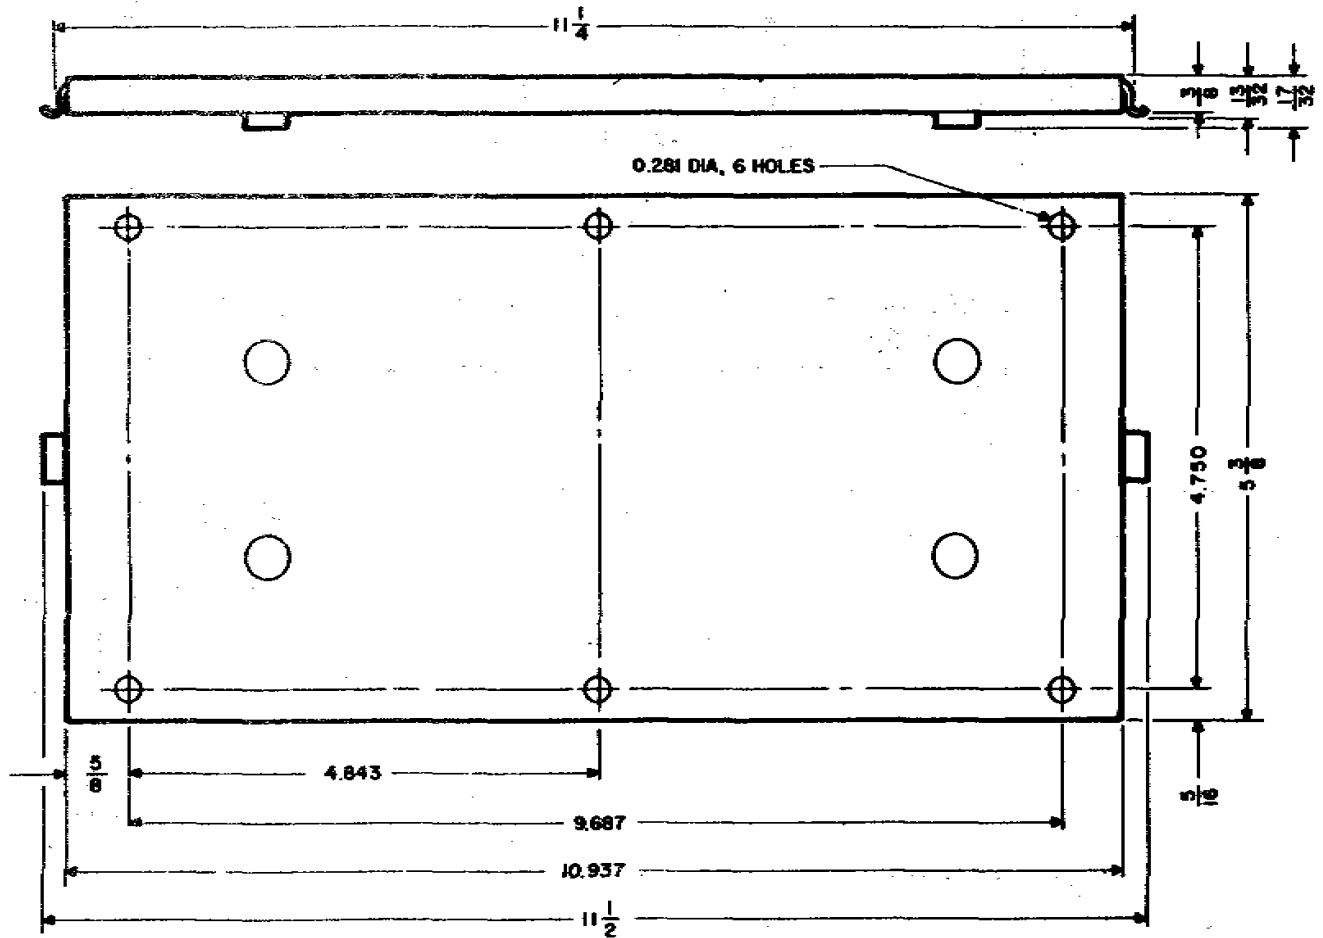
Mounting MT-2977/PRC-41, Outline and Mounting Dimensions
